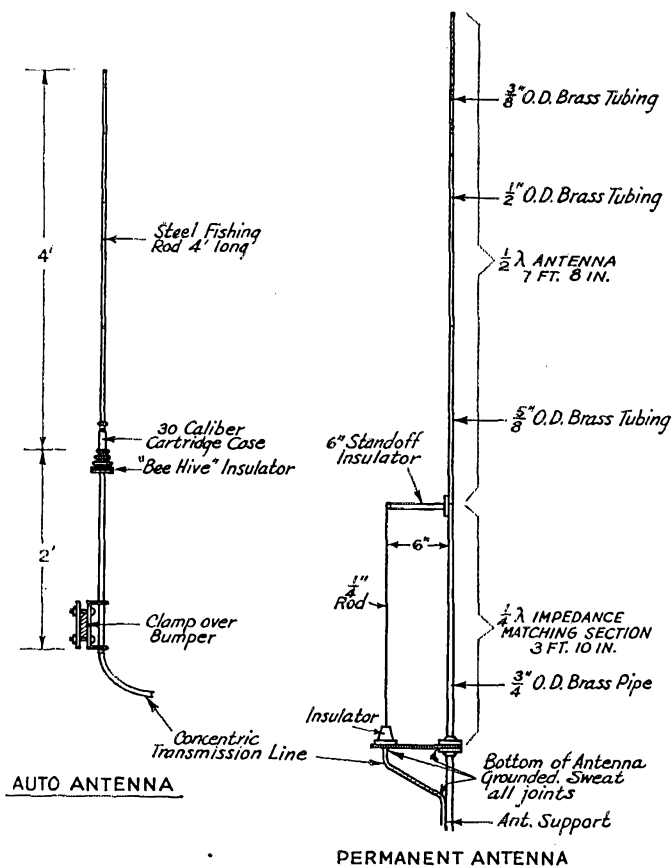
CONSTRUCTIONAL DETAILS OF THE CAR ANTENNA
